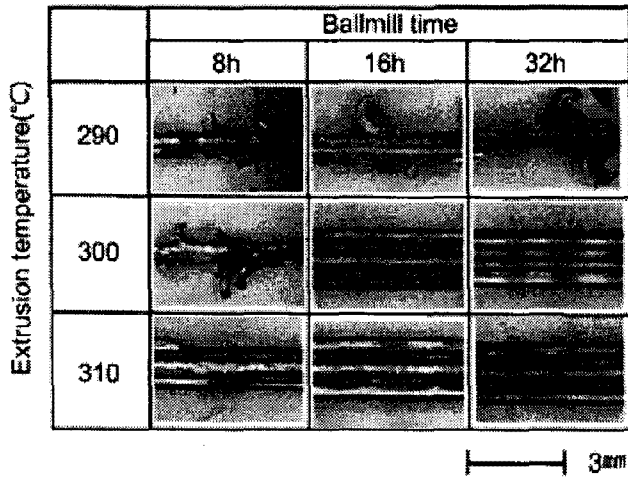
Surfaces of the spur gear extruded according to ballmill time and extrusion temperature
